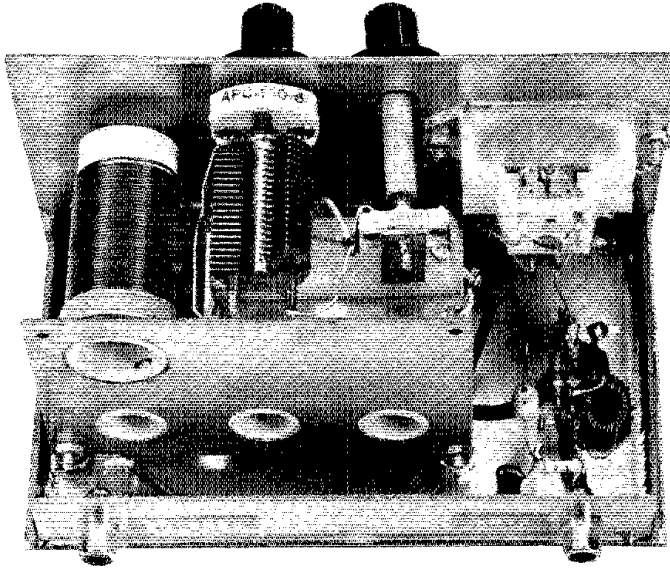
Interior view of the assembled ATU. "Ugly construction" (see text) is used for the SWR-bridge circuit, lower right. The subassembly, chassis and panel are made from pieces of single- and double-sided PC board. The seams are soldered to hold the sections together.
